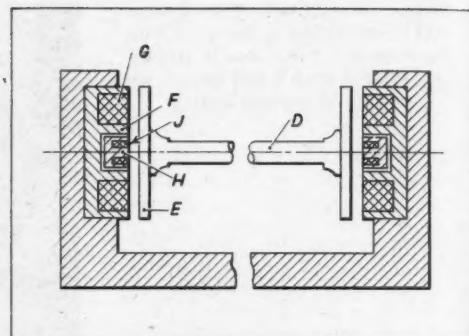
The shaft *D* is supported on magnetic bearings (not shown) of the type seen in Fig. 1, and is stabilized axially by a pair of co-axial electromagnetic bearings, at each end
